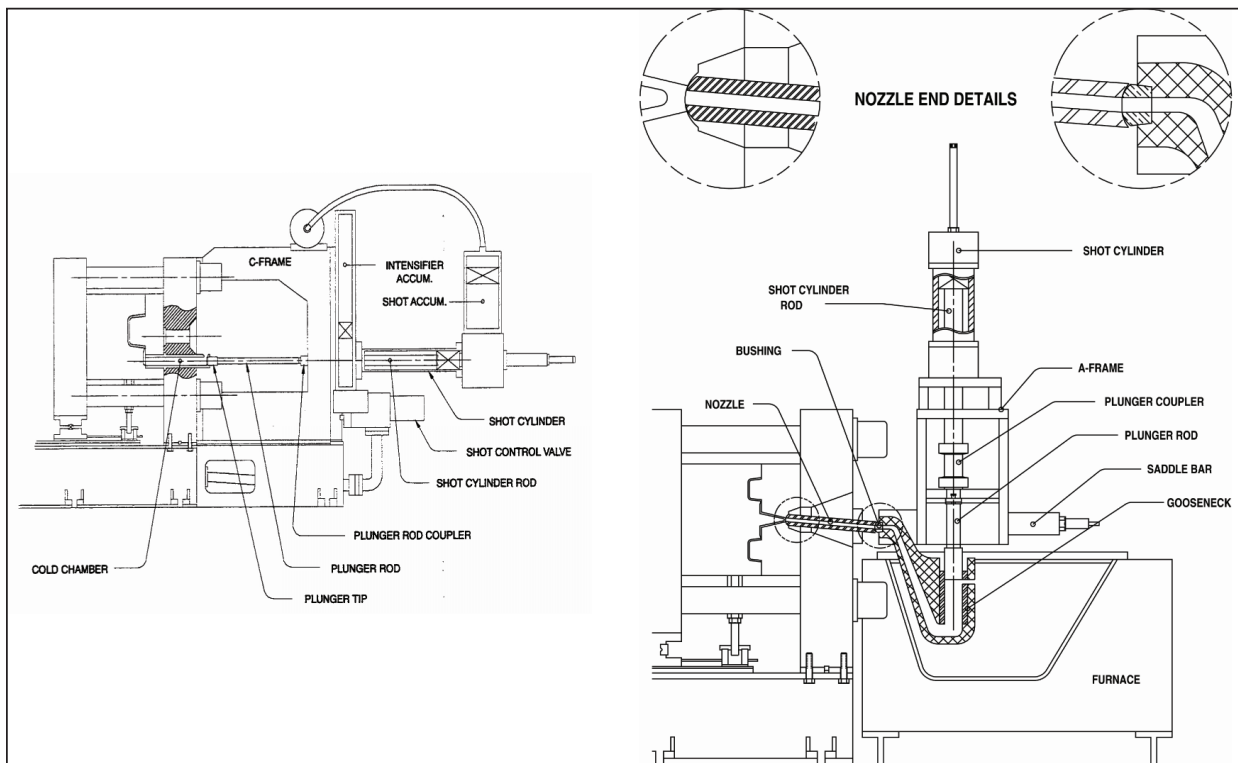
The basic simplicity of the die casting machine is obscured by the auxiliary equipment, pumps, motors, pipes, control valves, etc., which are needed for efficient operation of the process.
